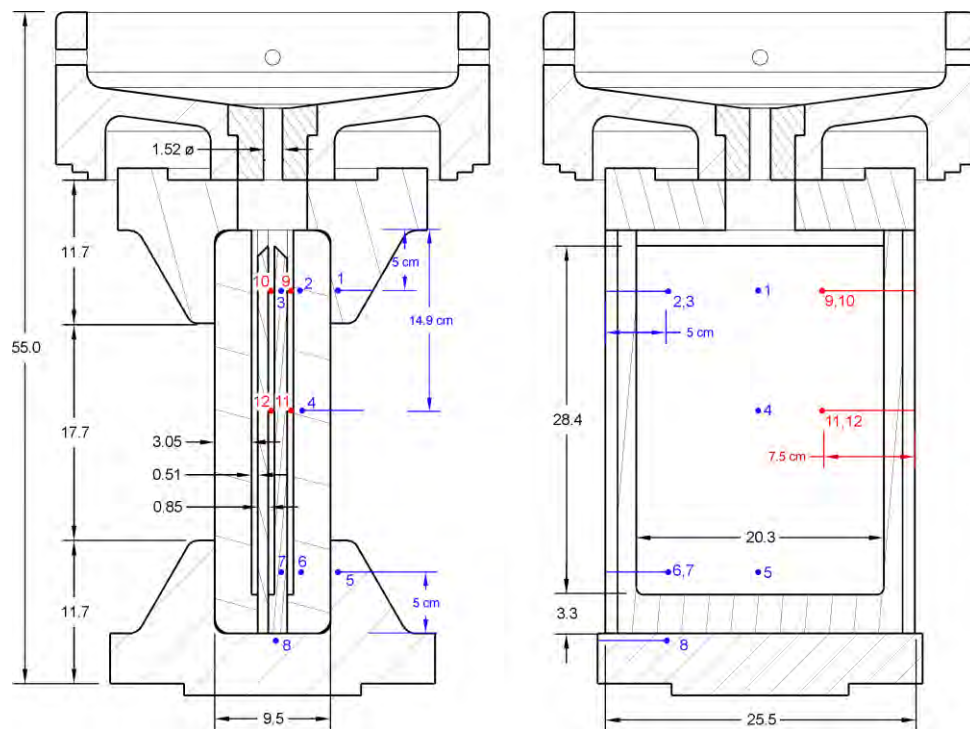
Front and side views of the initial mold design. The location of thermocouples is shown with blue for thermocouples imbedded in the graphite and red for thermocouples in the casting cavity. Dimensions are in centimeters.
